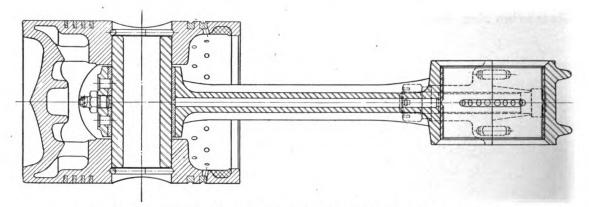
Cross Section of Piston and Connecting Rod Assemblies
